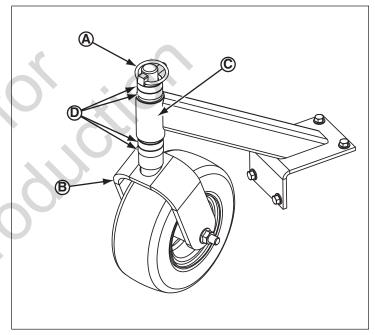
Adjusting the Number of Spacers Below the Caster Arm
